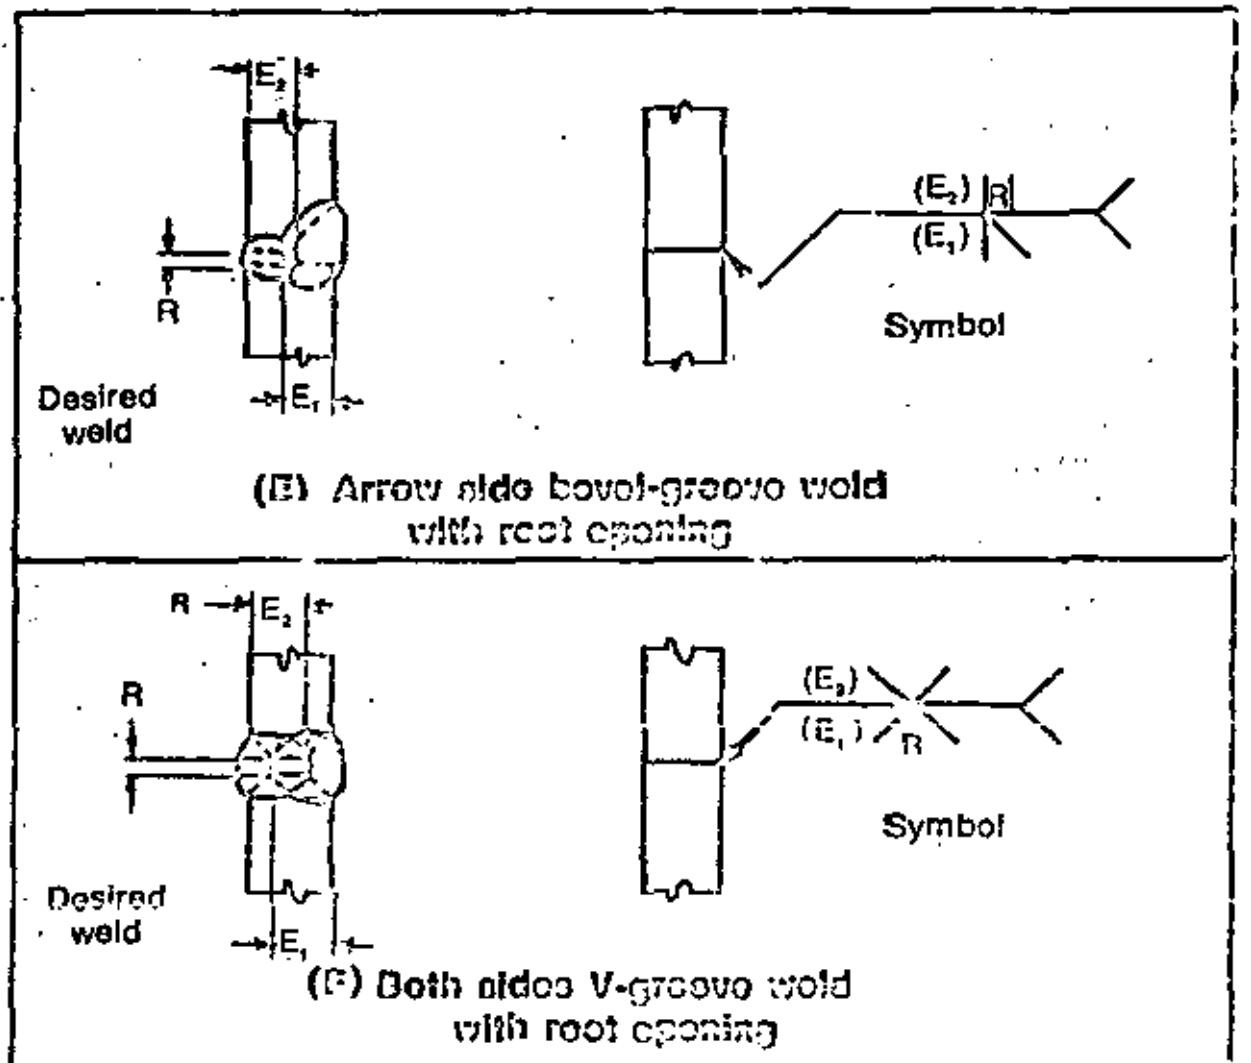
(cont.)—Designation of effective throat of groove welds with specified joint preparation.
